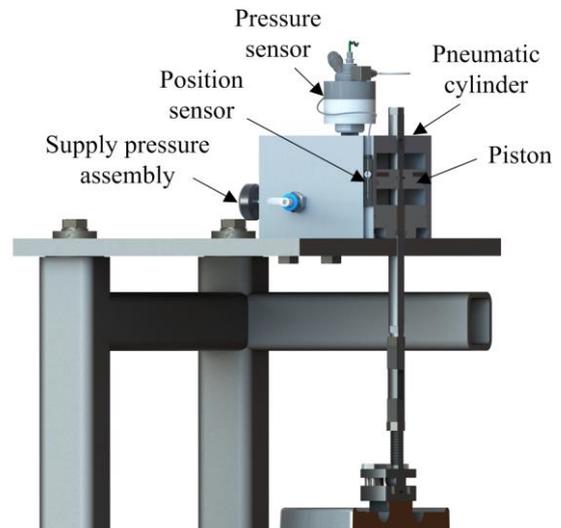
Cross-sectional view of the piston-cylinder assembly.
